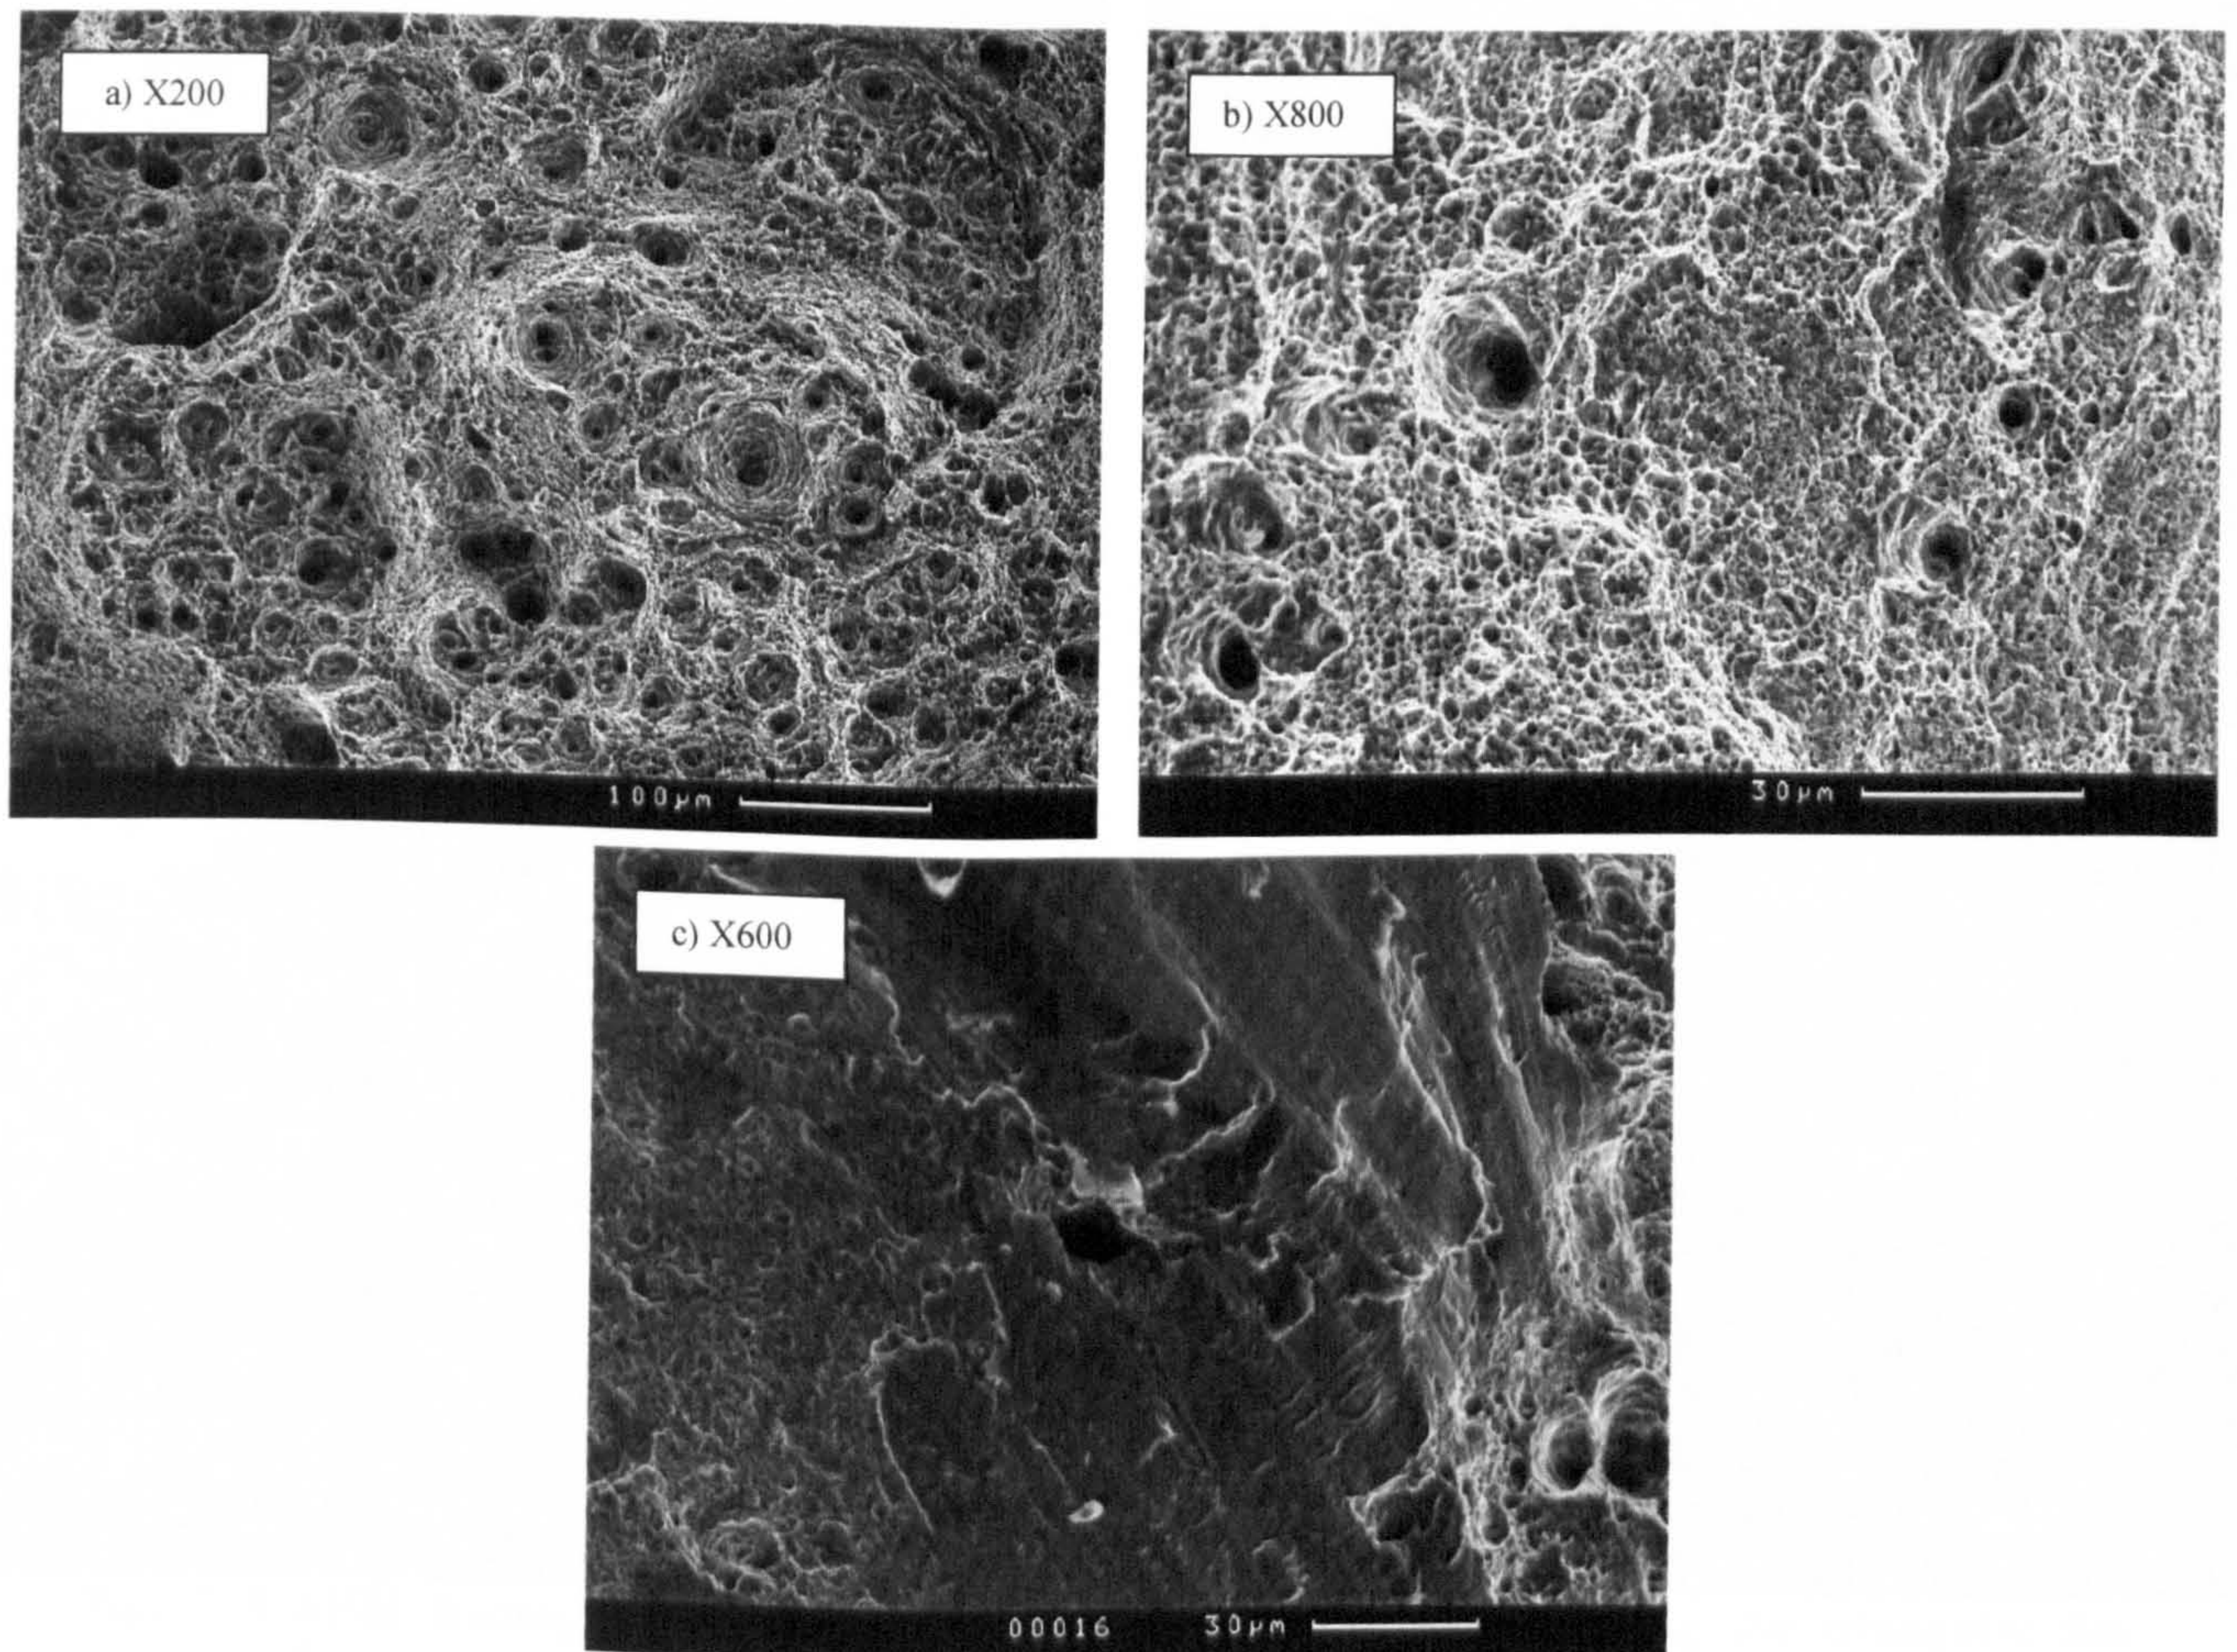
SEM fractography of tensile specimen in thickness direction: a) close up of the flat fracture at the centre zone, b) close up of ductile shear in slanted zone and c) close up of the smooth area (quasi-cleavage fracture) in slanted zone.
